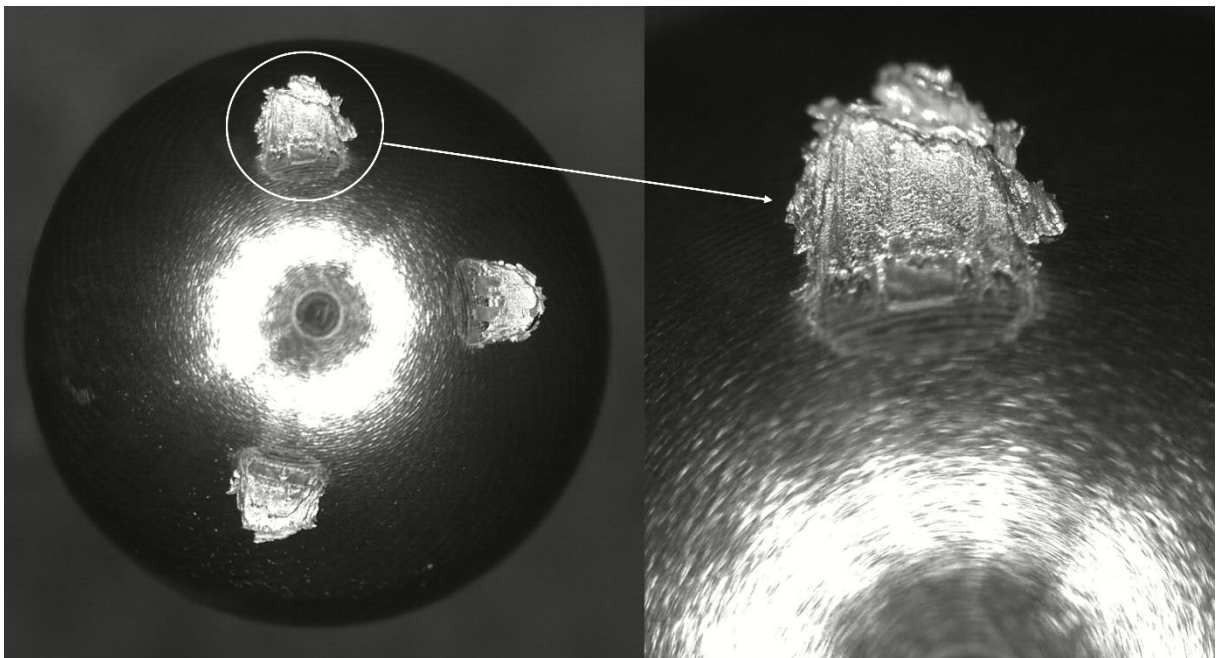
LOM image exemplifying the location of contact interaction between pin and workpiece surfaces during pin-turning tests.
